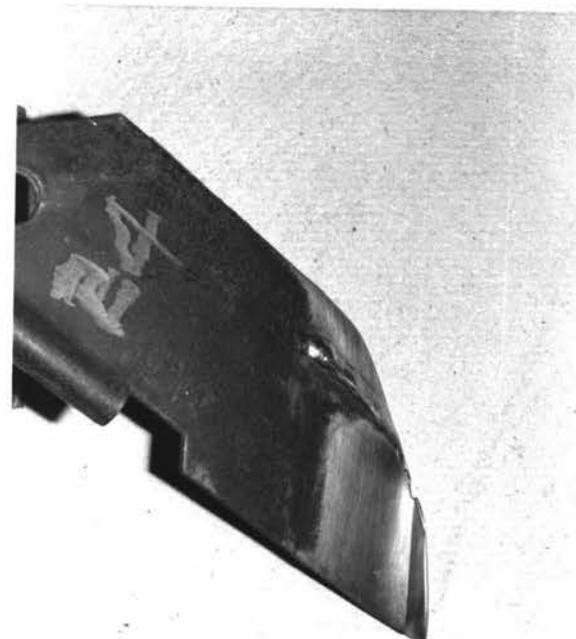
Field wear of Toolcraft (-bottom pattern) welded over mild steel in Run A.
